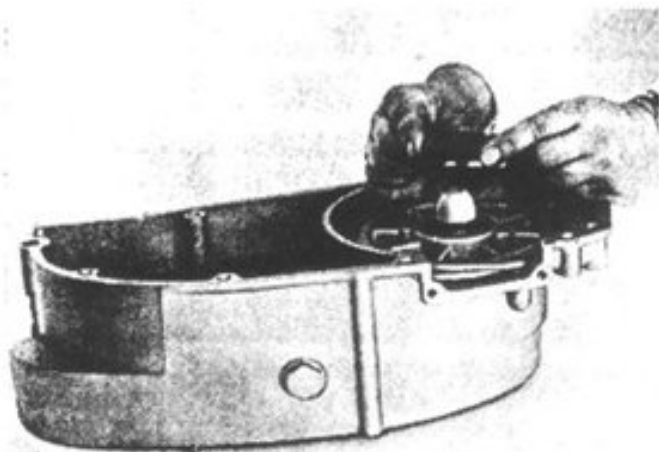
Setting the ИЖ-Ю-3 motorcycle oil seal.
